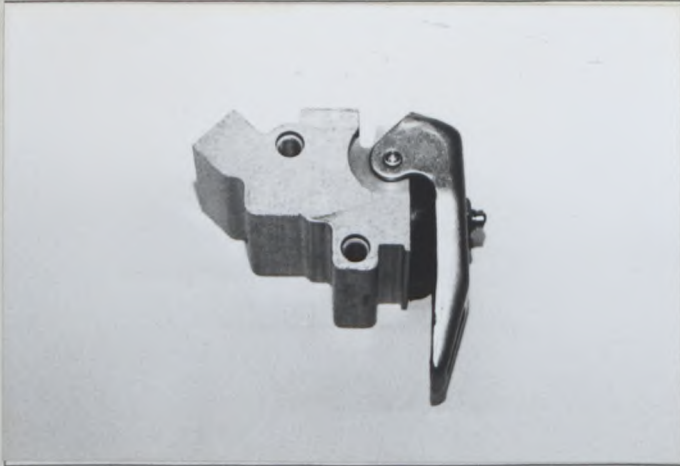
(BRAKE MASTER CYLINDER)
